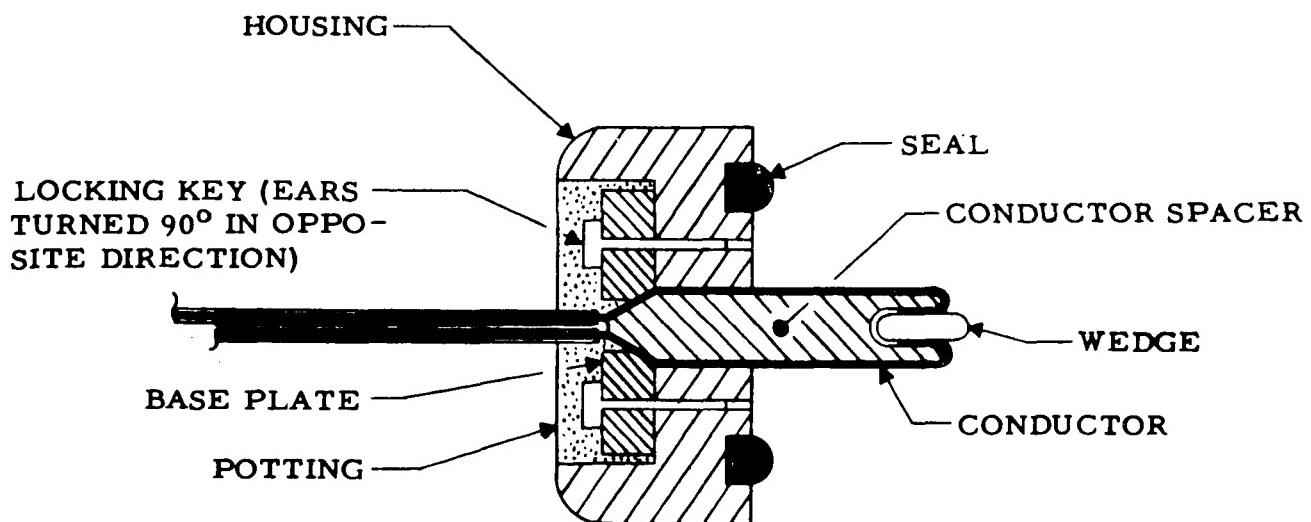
PREMOLDED RECTANGULAR PLUG (SECTION)
